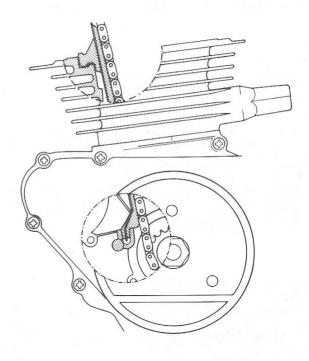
Cam chain guide blade installation – KLT200 and 250 (Sec 13)
